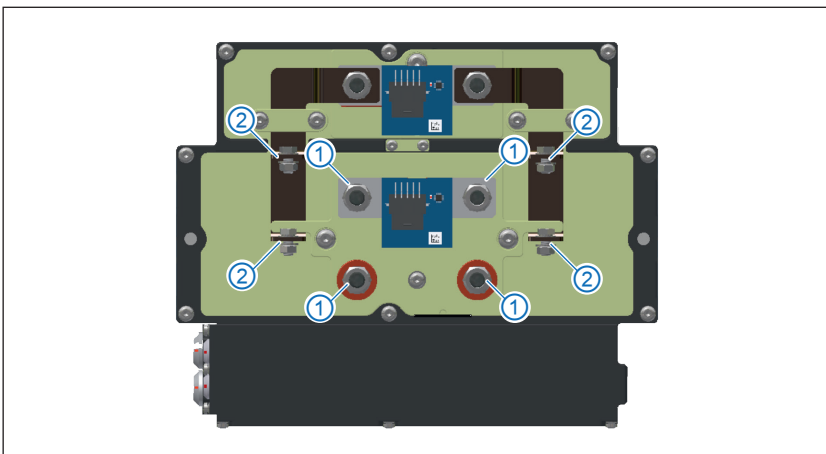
HV BM 1.2+S, removing nuts and washers
